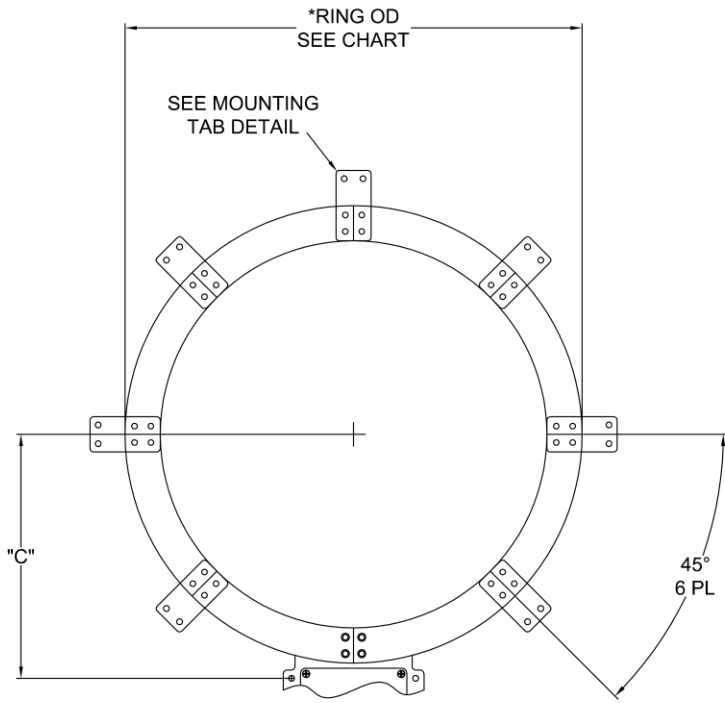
6" to 24" Shaft Diameter Dimensions
